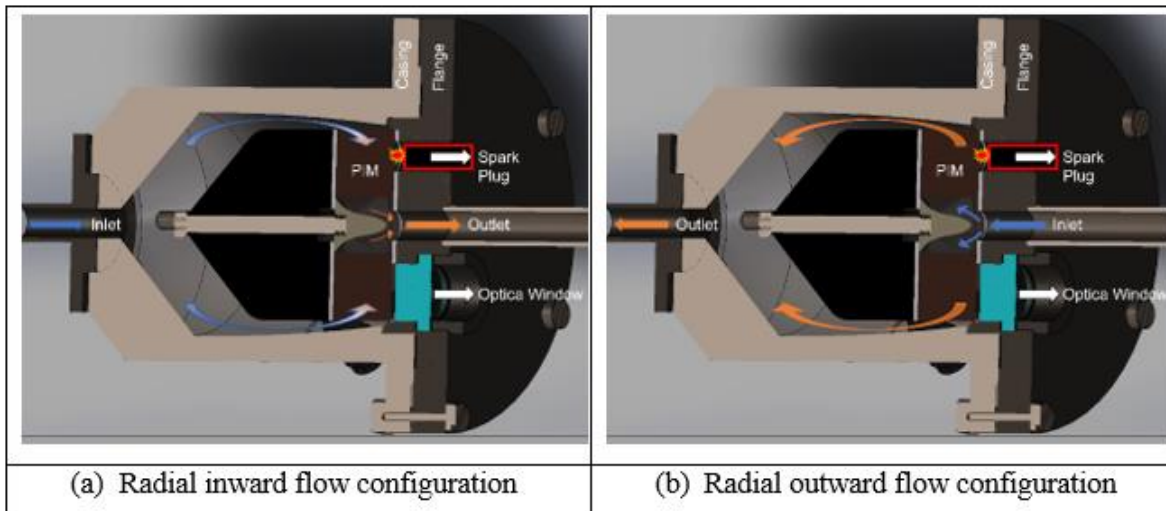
Sub Assembly 1 & 2 of the Burner
